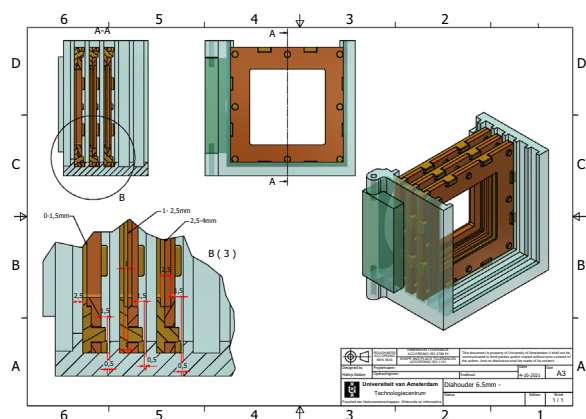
Technical drawings of the 3D-printed DIY filter holder
